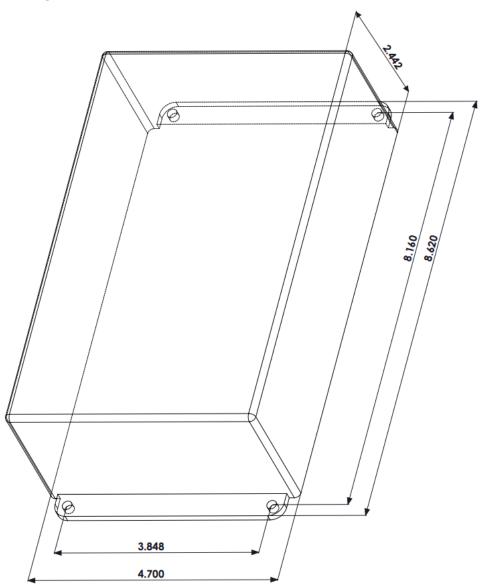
M7009 24VDC Buffer Module Dimensional Outline
